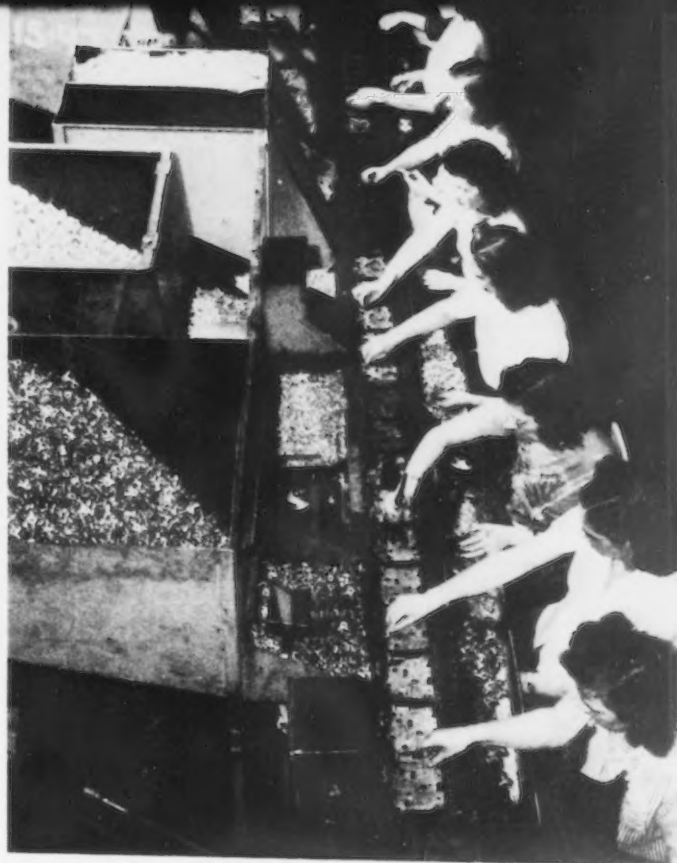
This belt assembly line, supplied with parts from hopper bins, is typical of the small part assembly system in this plant.
